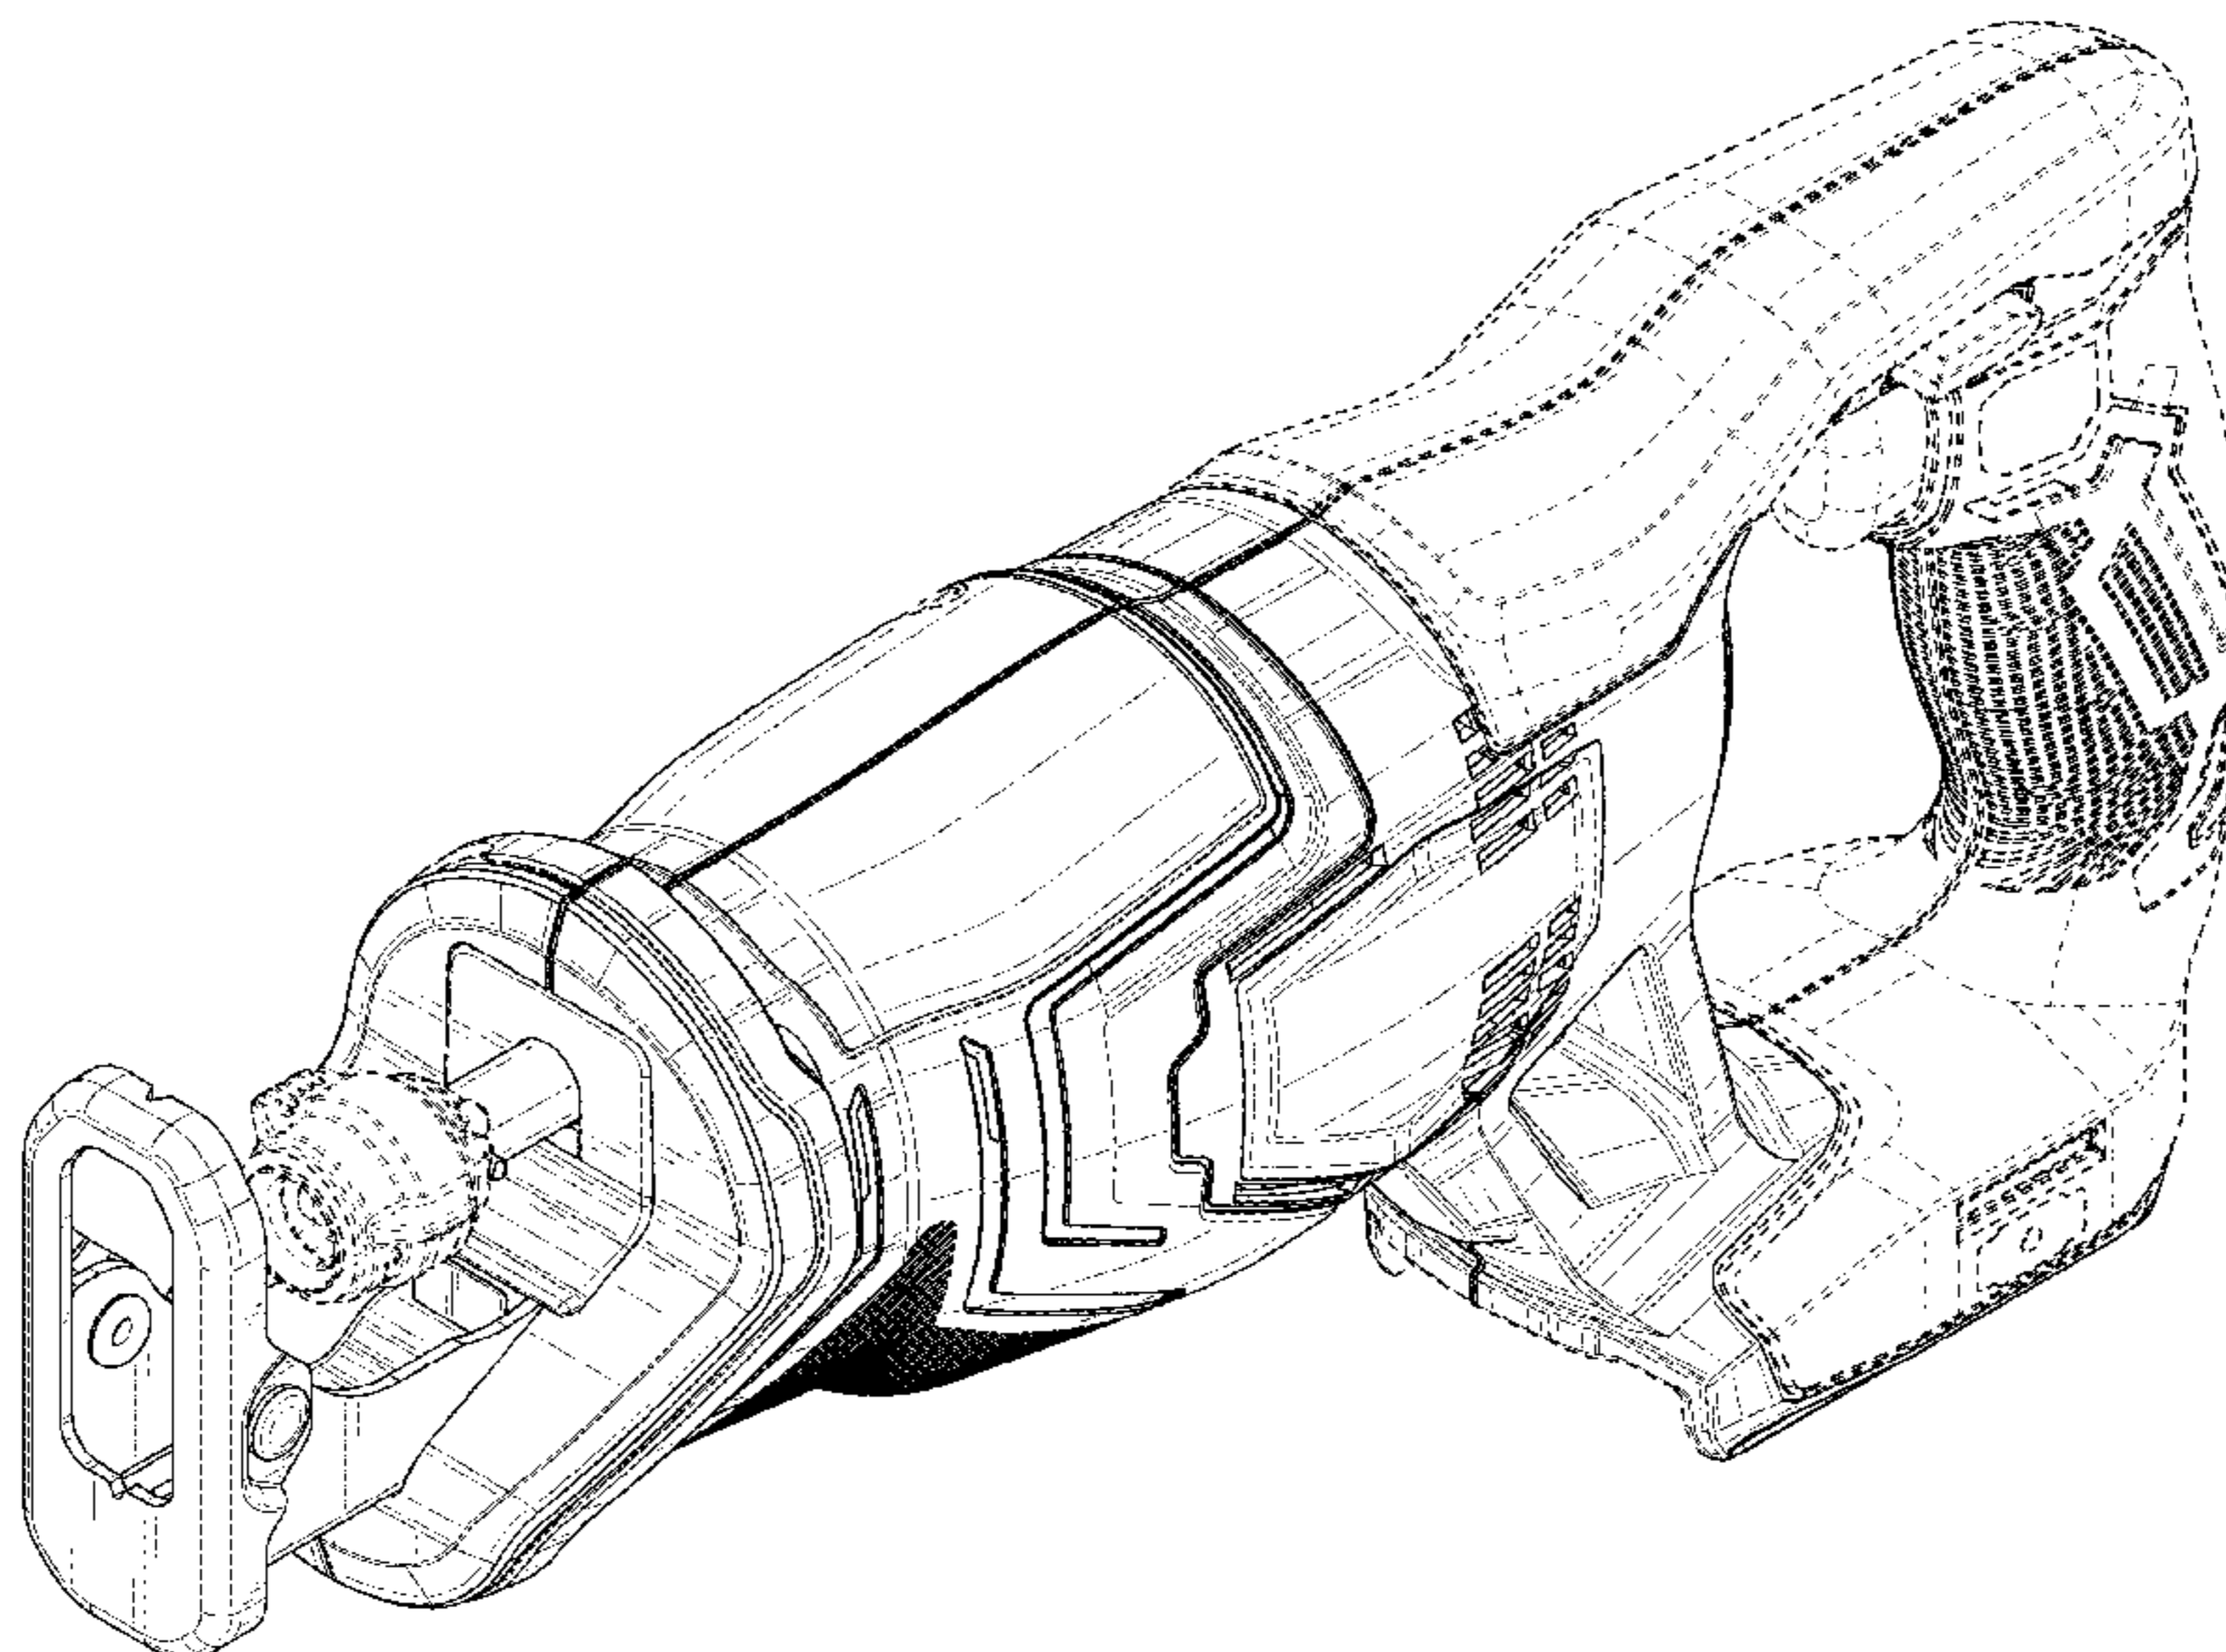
is a top, front, and left side perspective view of a reciprocating saw showing our new design;
